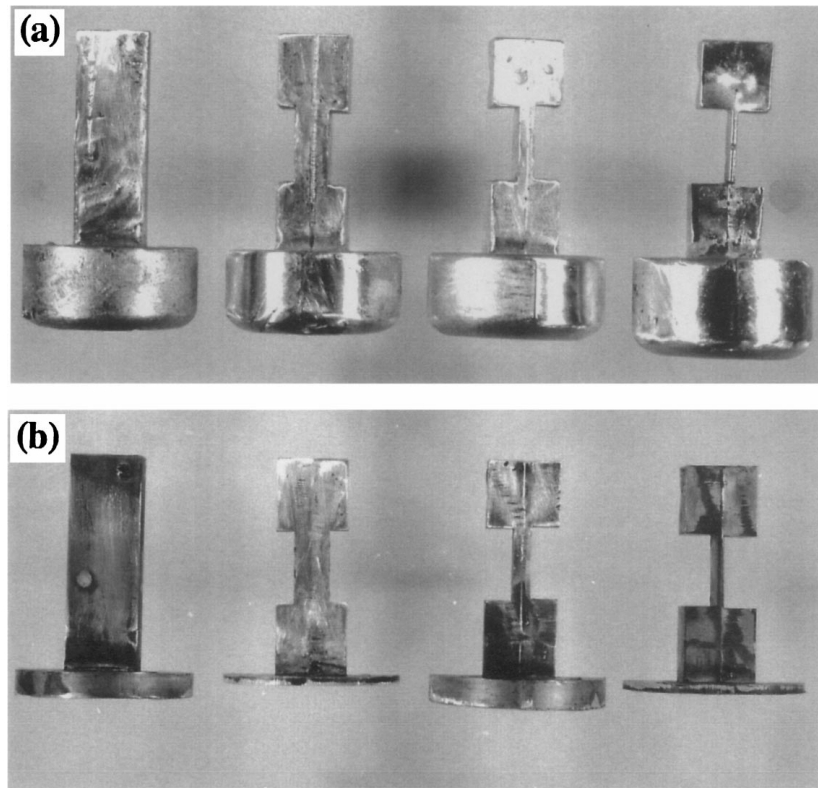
Photographs of 7050 billets with section thicknesses of 20, 10, 5 and 2 mm manufactured by (a) gravity casting and (b) indirect squeeze casting.
